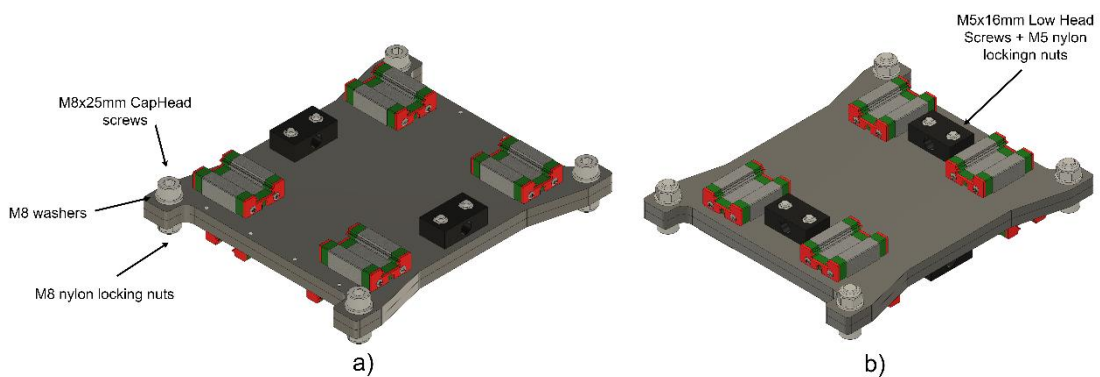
a) Top isometric view of the XY gantry plate with the M8x25mm Cap Head screws + M8 washer + M8 nylon Locking nuts installed. b) Bottom isometric view of the XY plates with the POM nuts installed with M5x16mm Low head screws + M5 nylon locking nuts.
